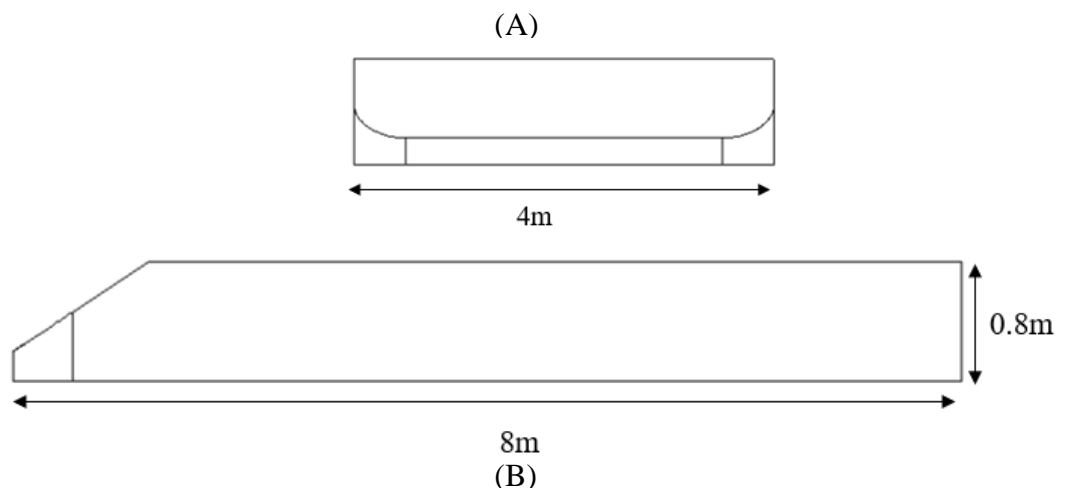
Diagram of hovercraft hull base dimensions (A) Front View, (B) Side View
